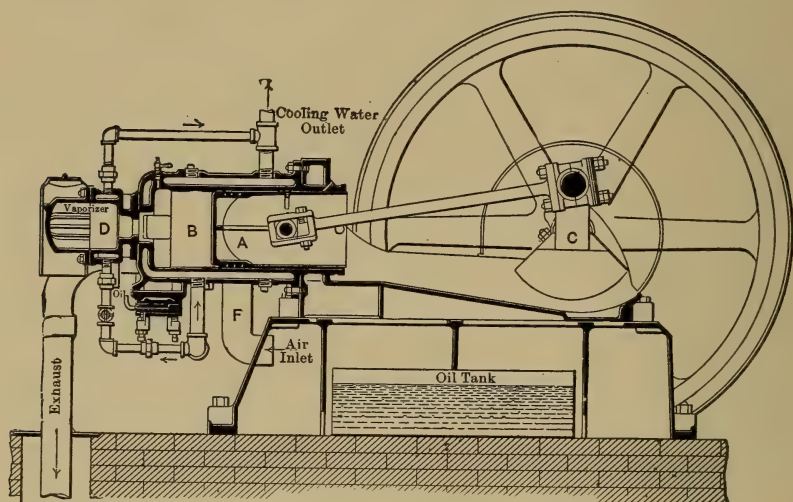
THE HORNSBY-AKROYD OIL-ENGINE.
